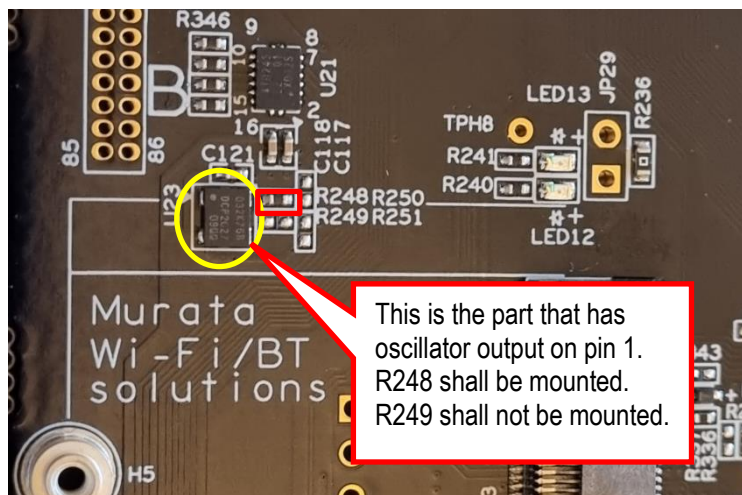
uCOM Carrier Board rev PB2, U23 with correct mounting of R248/249
